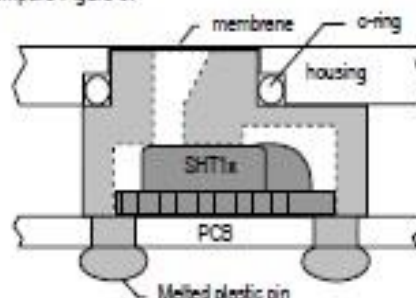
Side view of SF1 filter cap mounted between PCB and housing well. Volume below membrane is kept minimal.
